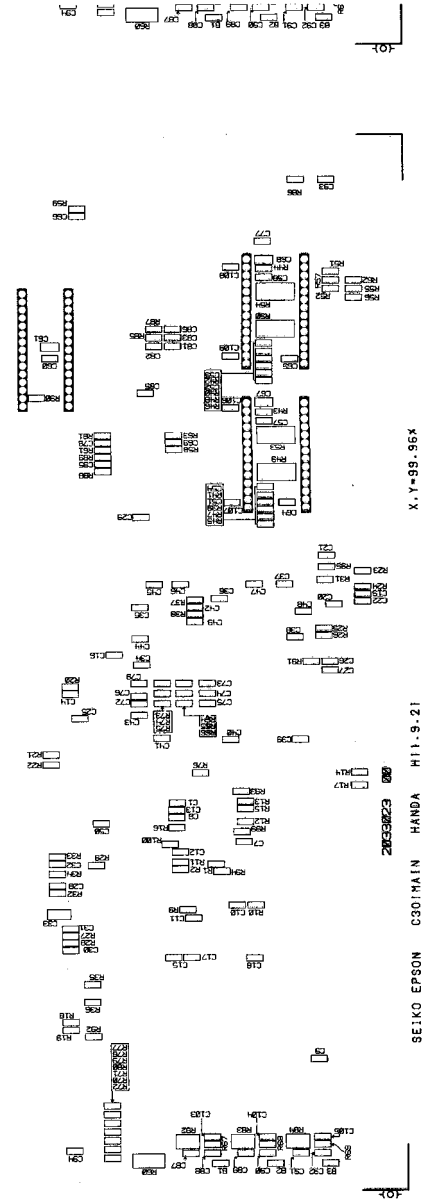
C301MAIN Component Layout (Soldered Side)
